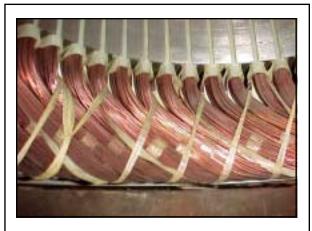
Coil extension for 4-pole motor as supplied by manufacturer.
